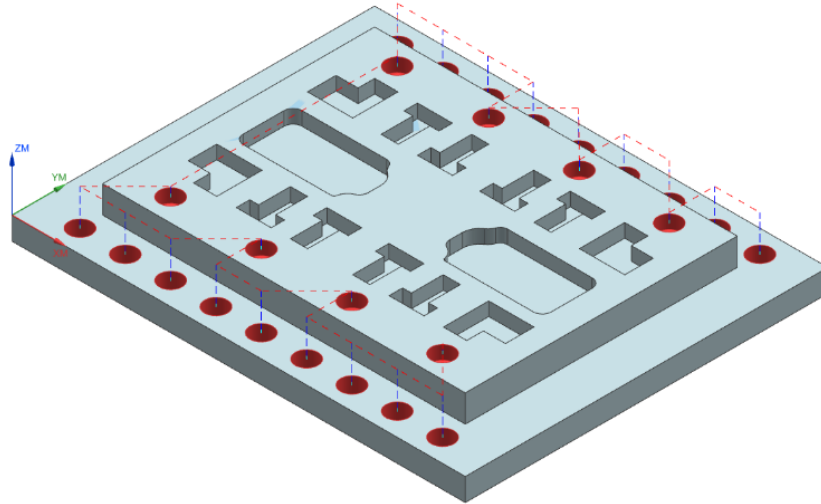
Shortest drilling toolpath generated on the workpiece with multiple holes
